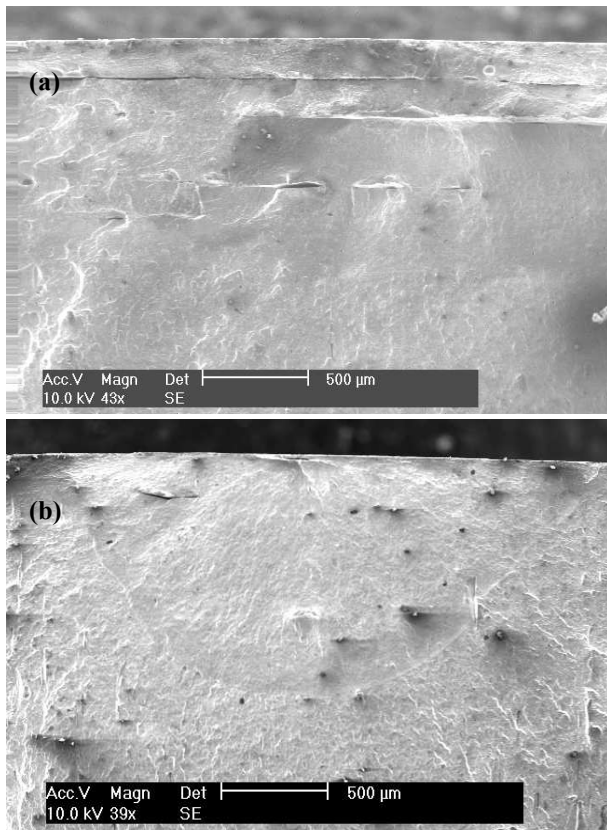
Fatigue fracture appearance of the P20 mould steel welded specimens for the filler material C (table 3). $R=0$, $\Delta\sigma = 550$ MPa. Weld angles: (a) 0° ; (b) 45° .
